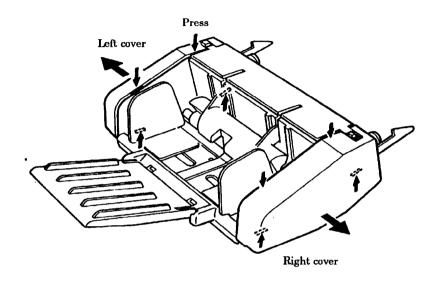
REMOVING THE ENVELOPE FEEDER FROM PRINTER
